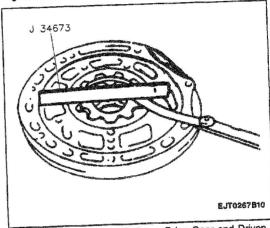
Measuring Oil Pump Drive Gear and Driven Gear Side Clearance
